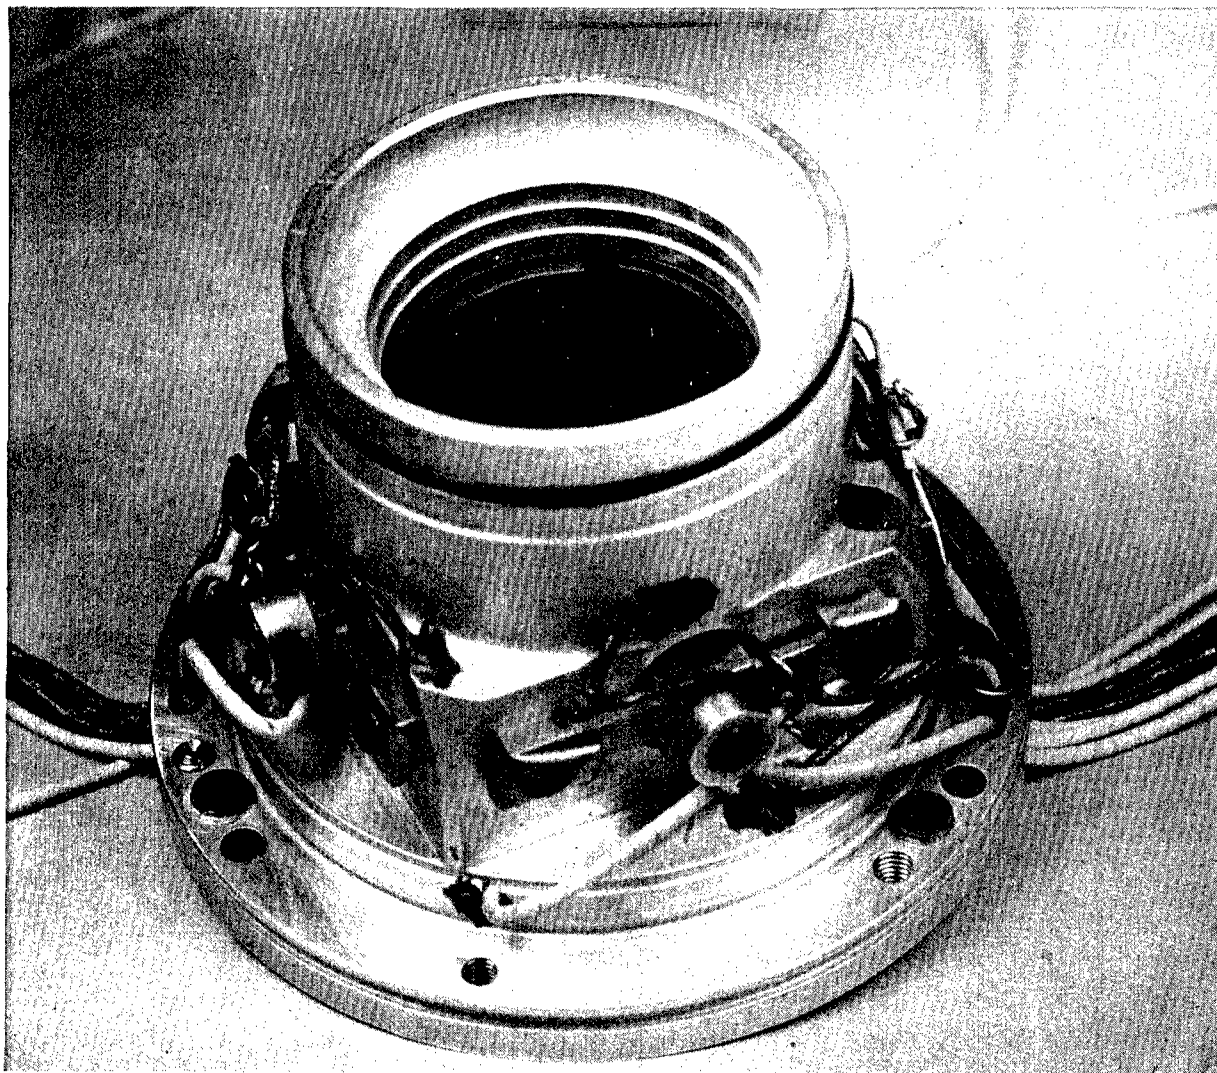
View Of The No. 1 Bearing Components Assembled
